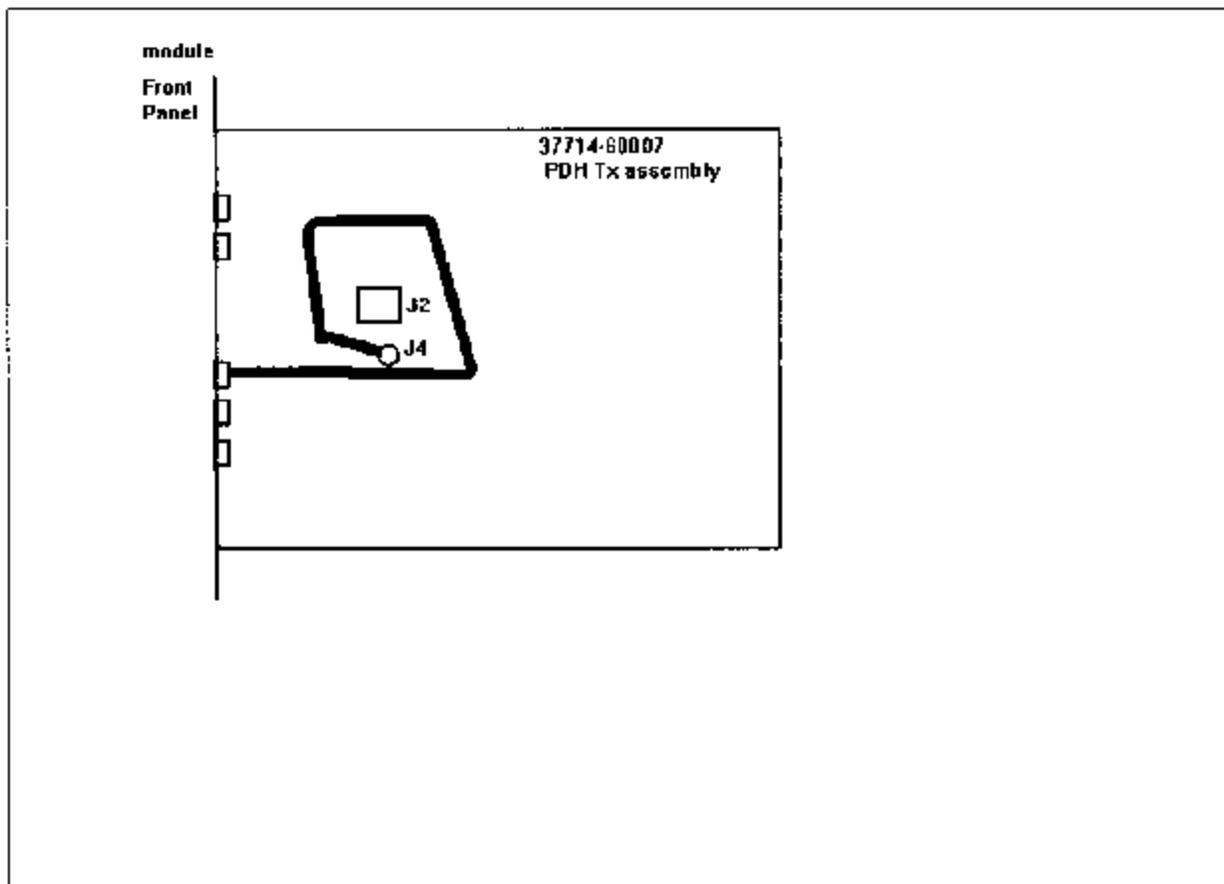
Showing Preferred Route for cable A7 J4 to Module Front Panel
